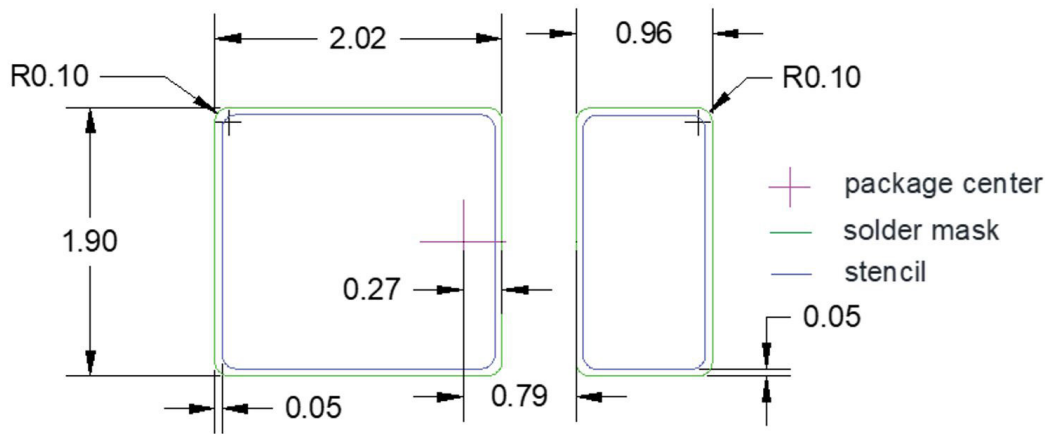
Recommended PCB solder pad layout for LUXEON 2835 Commercial Deep Dimming
